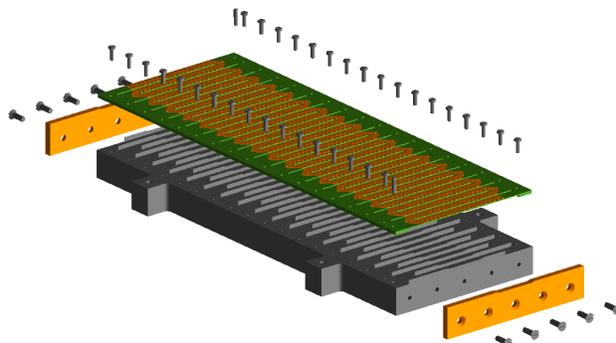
Exploded view of the 35-cm current structure assembly (courtesy of R.J. Roybal, LANSCE-1)
